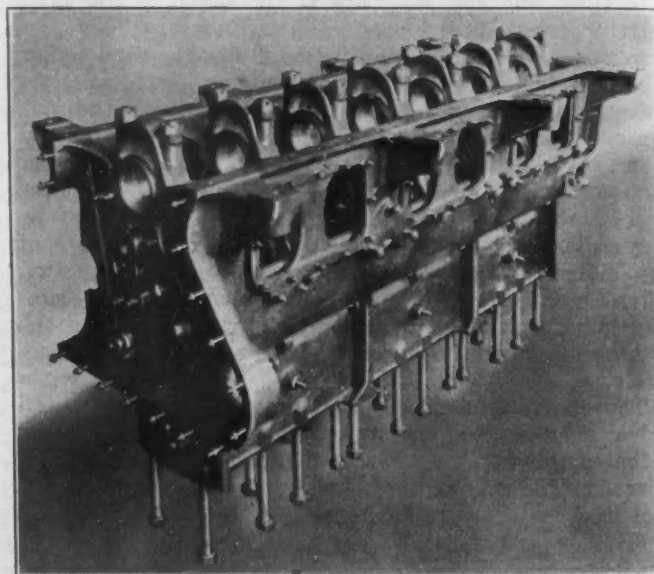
CRANKCASE OF THE ENGINE SHOWN IN FIG. 8
